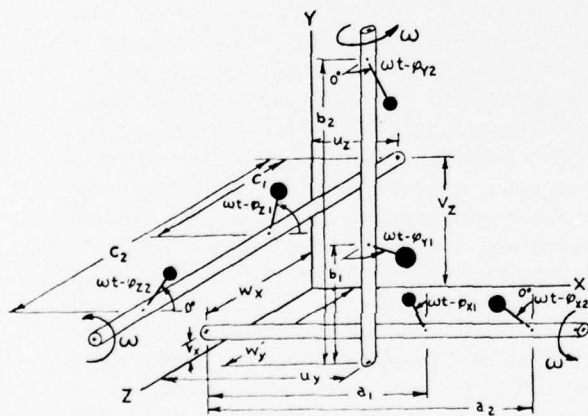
Configuration of Shafts and Balancing Weights Showing Positive Dimensions and Rotations
